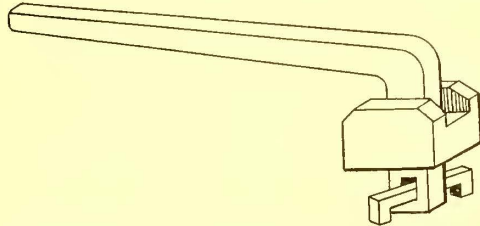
DEVICE FOR RIVETING ANGLE TO SLOT RAIL
